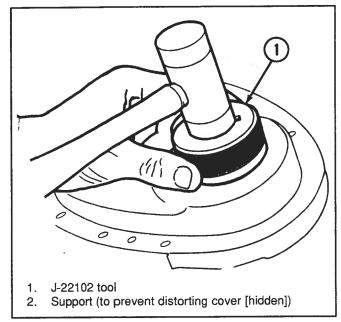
Installing Front-Cover-Oil Seal with Cover Removed
